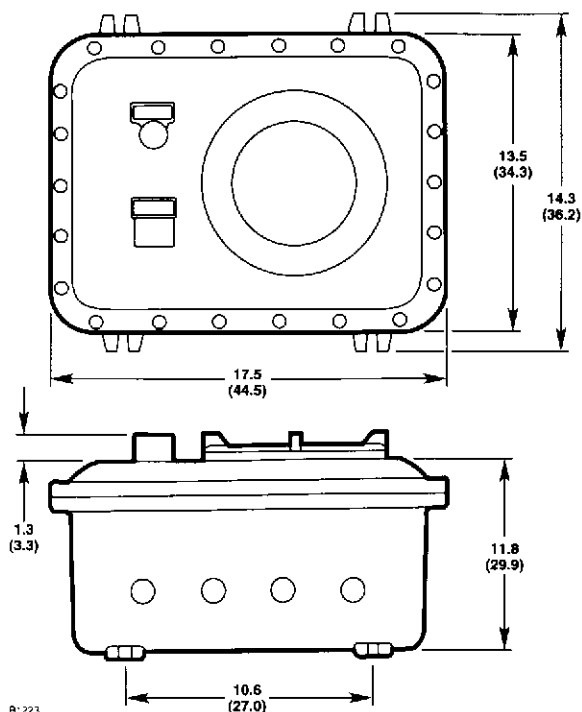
NEMA 7 Explosion-Proof Housing Dimensions
